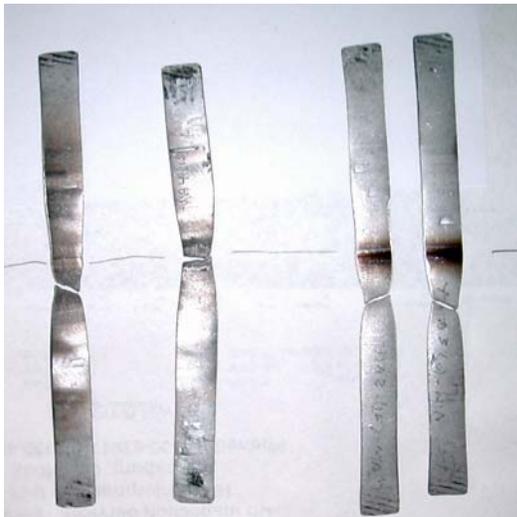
Laser welded/annealed and UHFSS circumferential 409 SS tensile test specimens (laser set on left)
